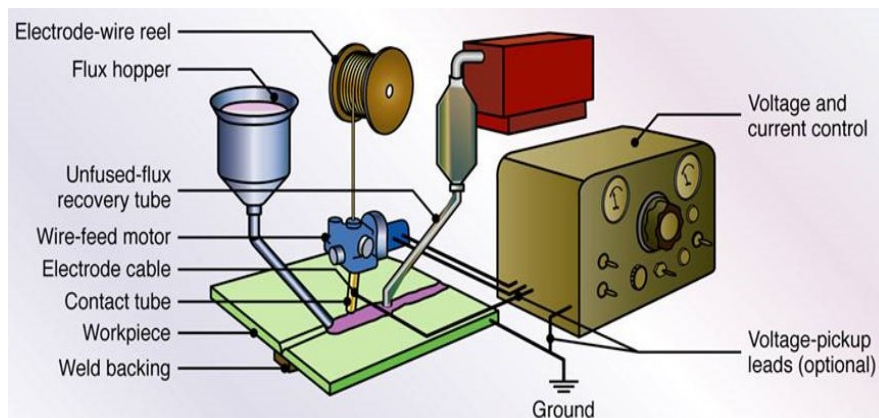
Principle of submerged arc welding (Youssef, 2017)
